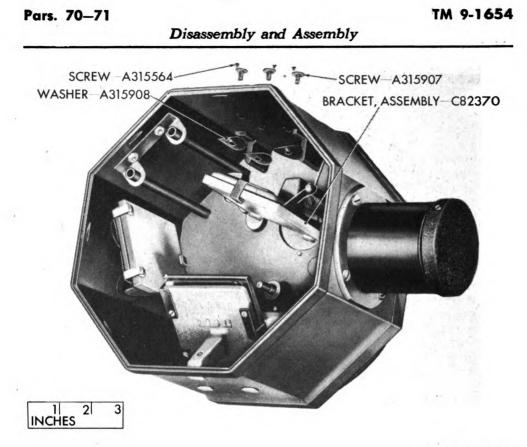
Upper Mirror Bracket Assembly Exploded From Target Housing Assembly of Trainer M6
